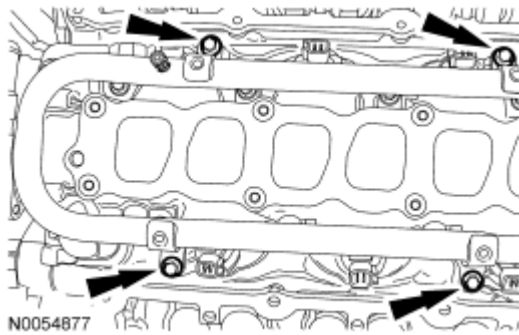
Locating Fuel Rail And Injectors & Bolts
